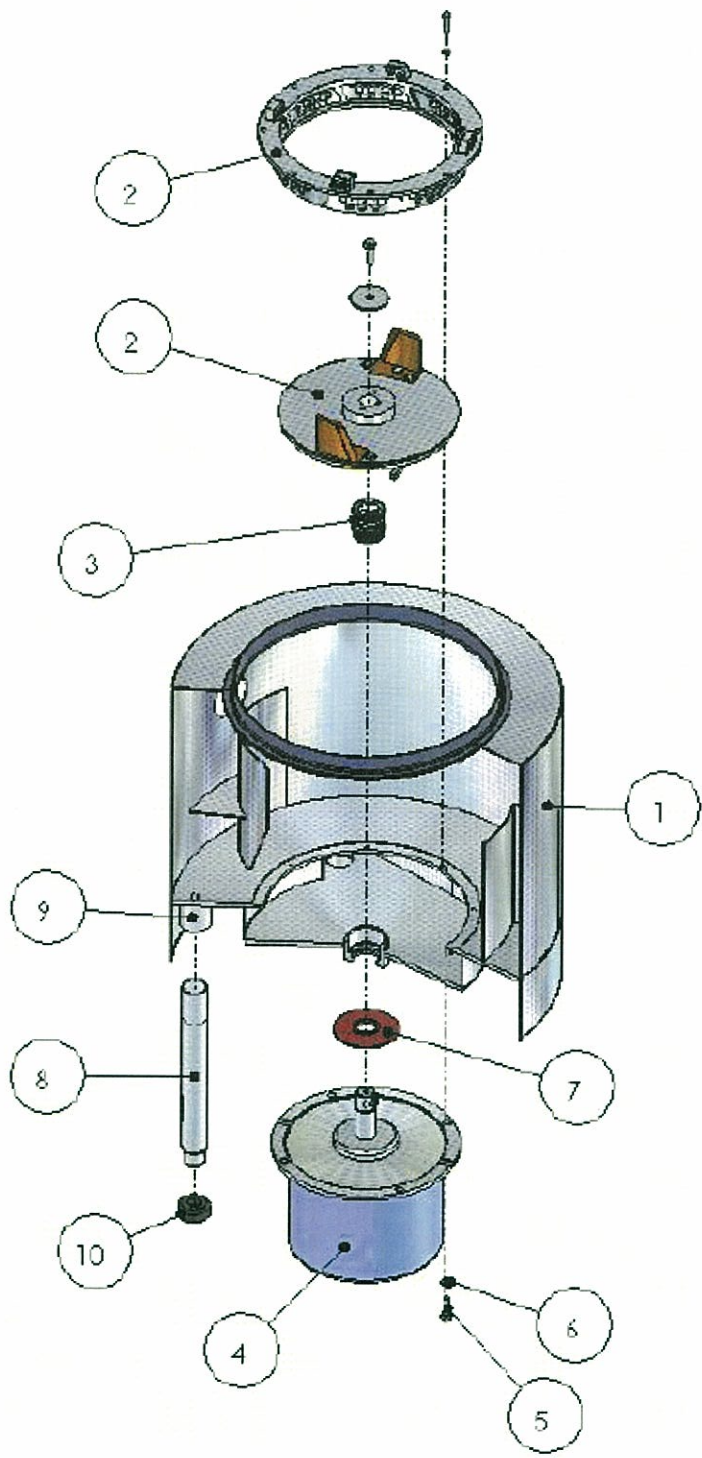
SPC-75S PULPER, EXPLODED VIEW
